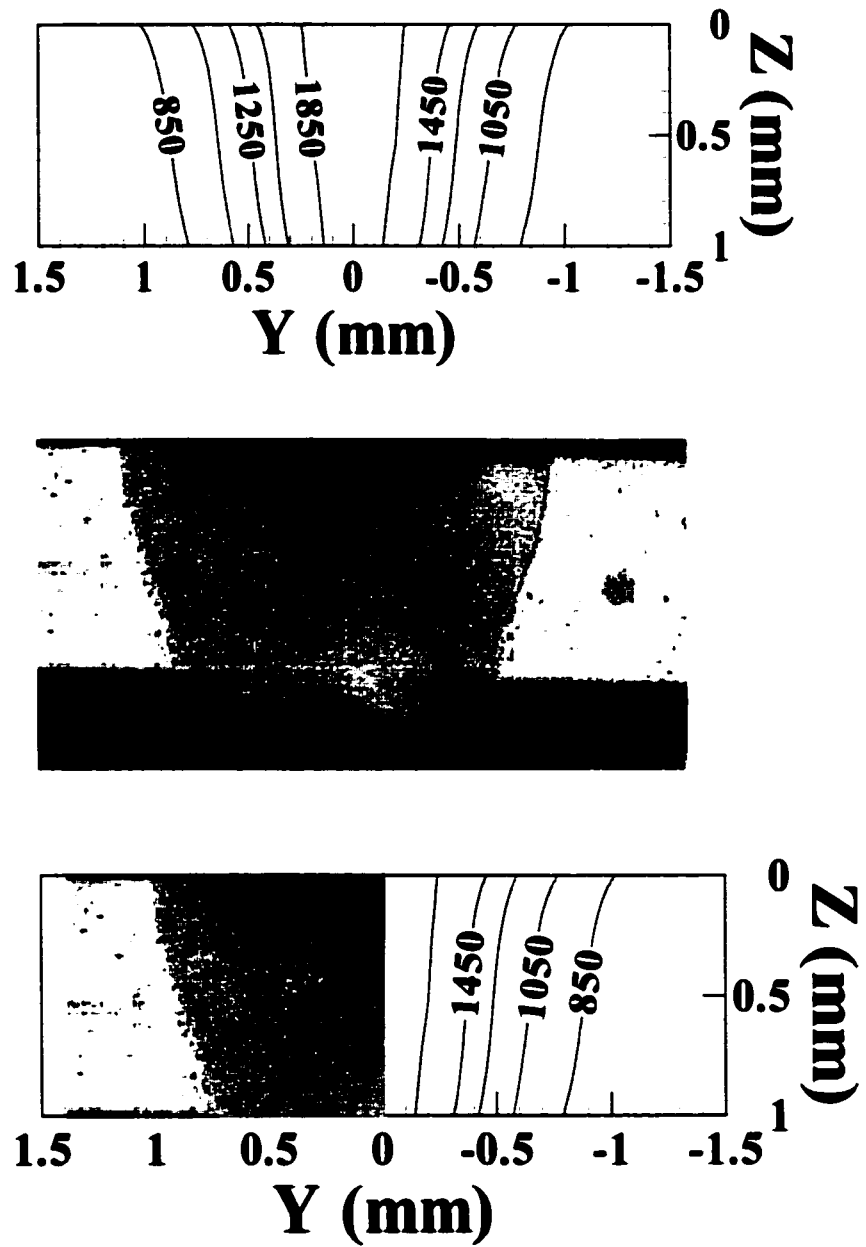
(a) Welding speed: 150 ipm
